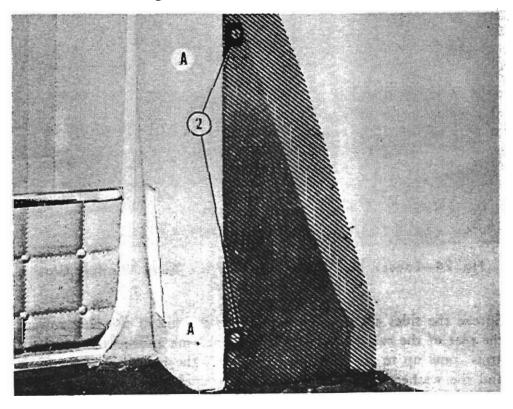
After Removing the Lower Trim Panel, Remove the Rear Trim Panel Retaining Screws.
